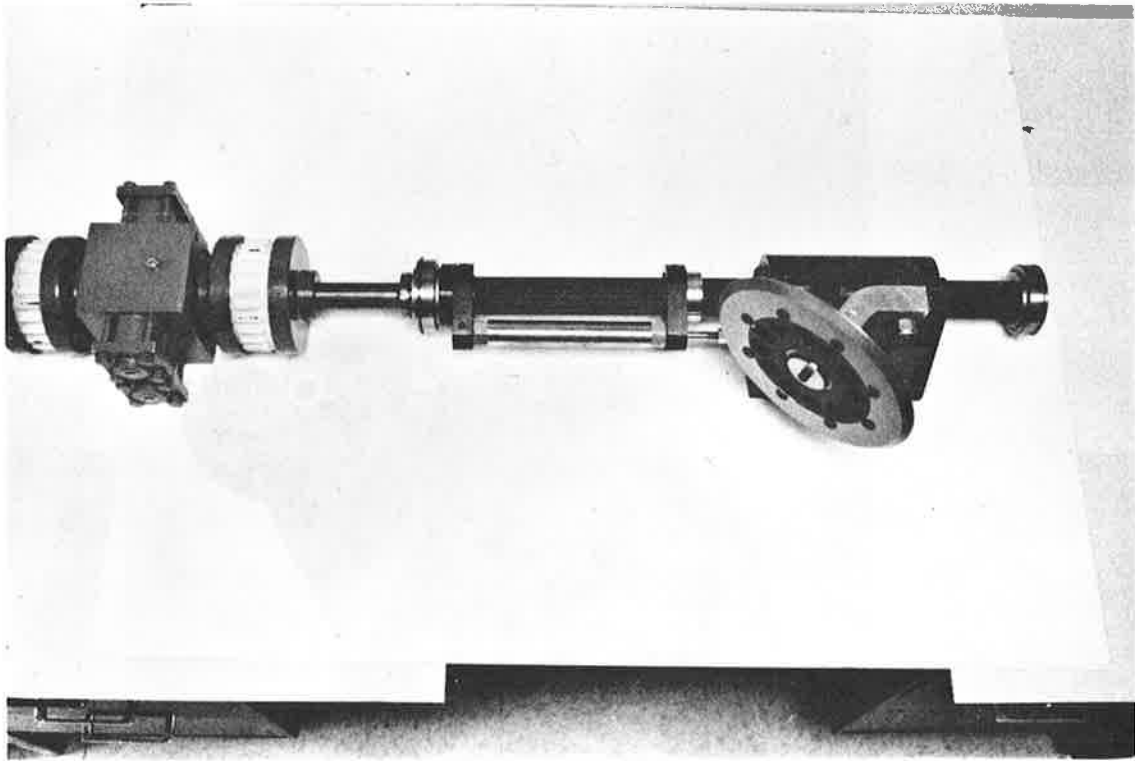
TRACK GEOMETRY MEASUREMENT
